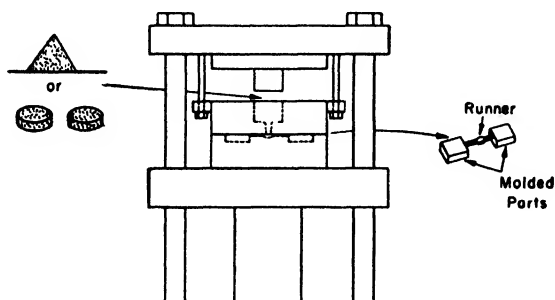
Schematic sketch showing the steps in transfer molding.
